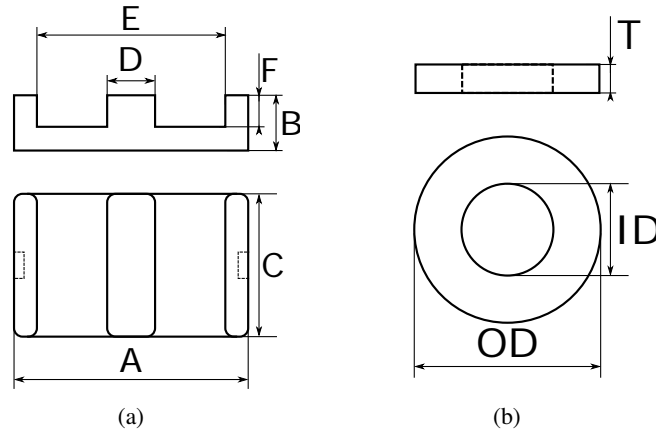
(a) Drawing of the core geometric dimensions for the "Planar" structure. (b) Drawing of the core geometric dimensions for the "Embedded Toroidal" structure.
